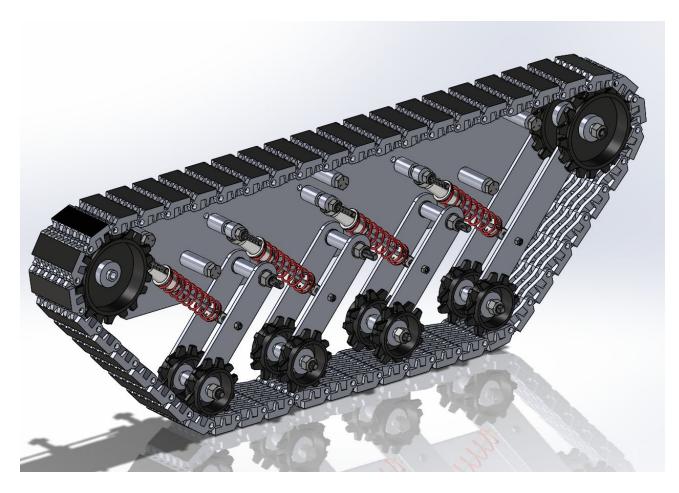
Final Tread System Sub-Assembly. Outer tread plate remove for inside view
